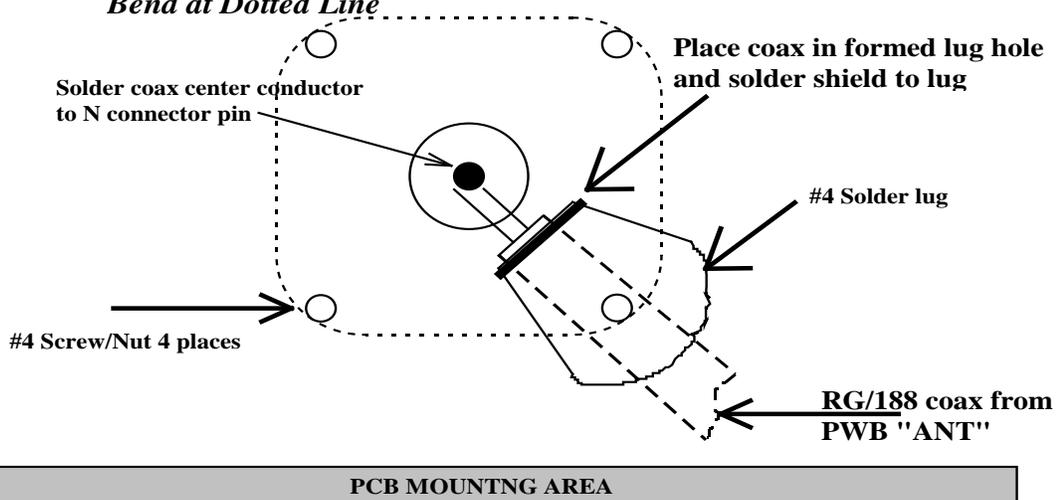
Inside View of Box, Solder Lug Installation on the 'N' Connector
